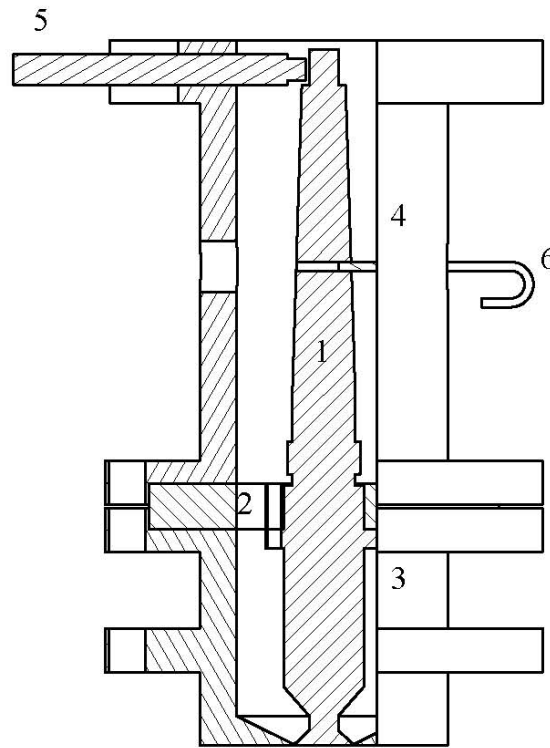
Engineering drawing of the Sliding Plate Rheometer.
